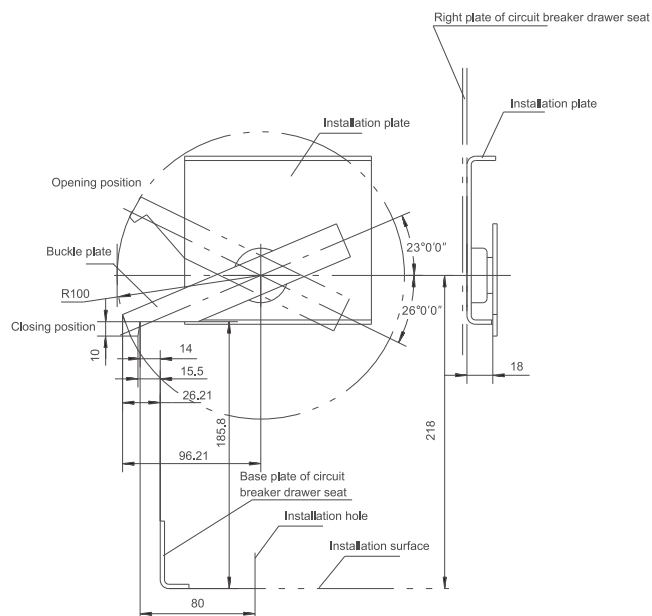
NA8-2500~7500 withdrawable type circuit breaker status door interlock installation dimensions
